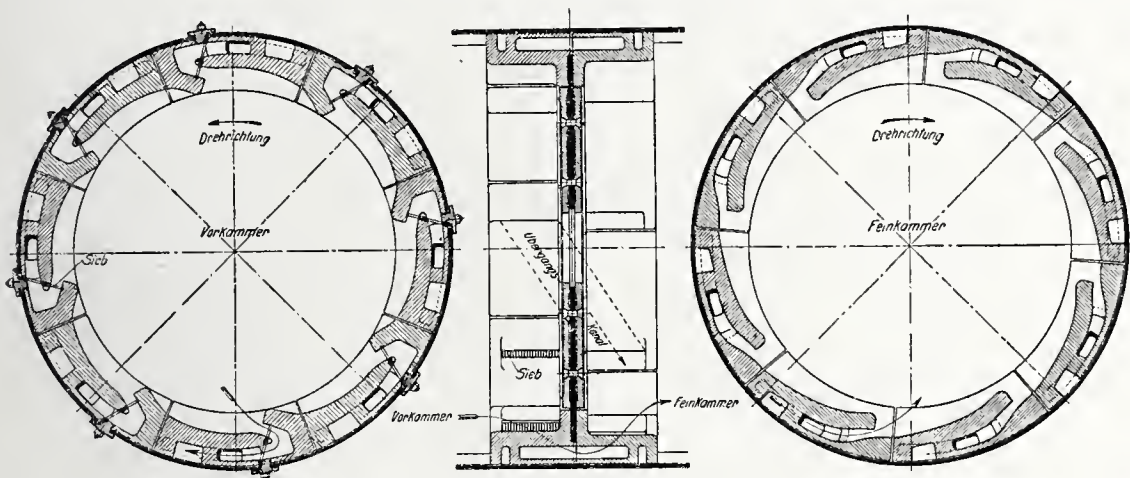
Sections of Lining Plates in Krupp Tube Mill.
